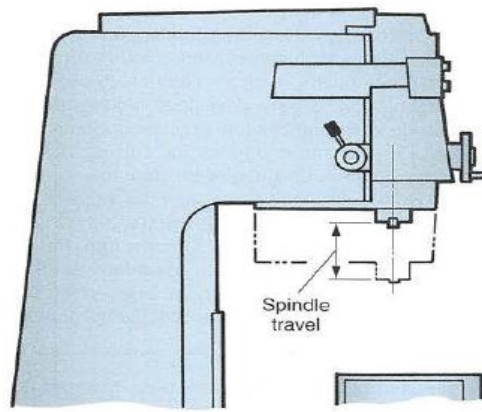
The spindle head is fixed in a vertical position on a sliding-head milling machine.
